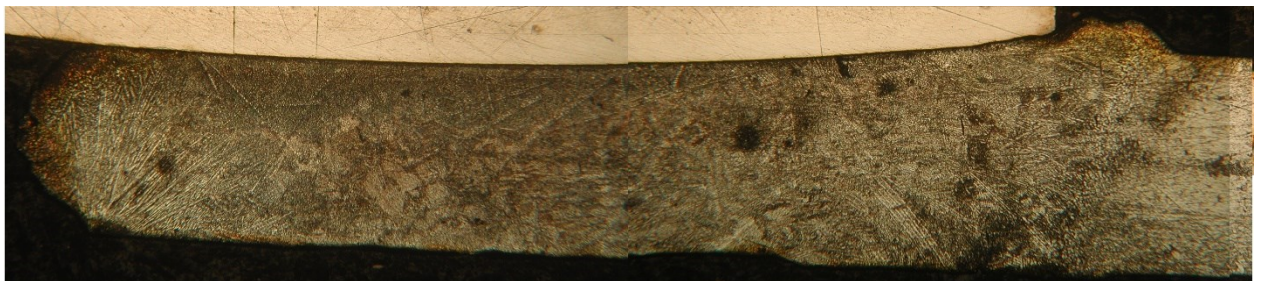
Microstructure of bead cross-section of joints at AZ31B side
